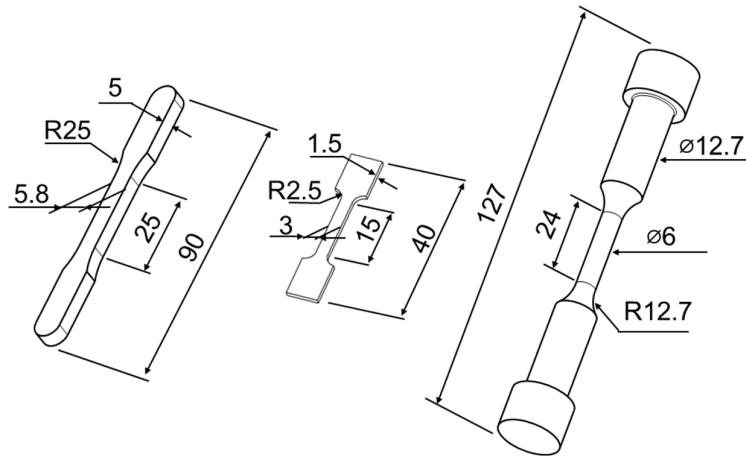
Technical drawings of the geometries used for tensile testing. From left to right: ISO 2740, miniature and elevated temperature test geometry.
